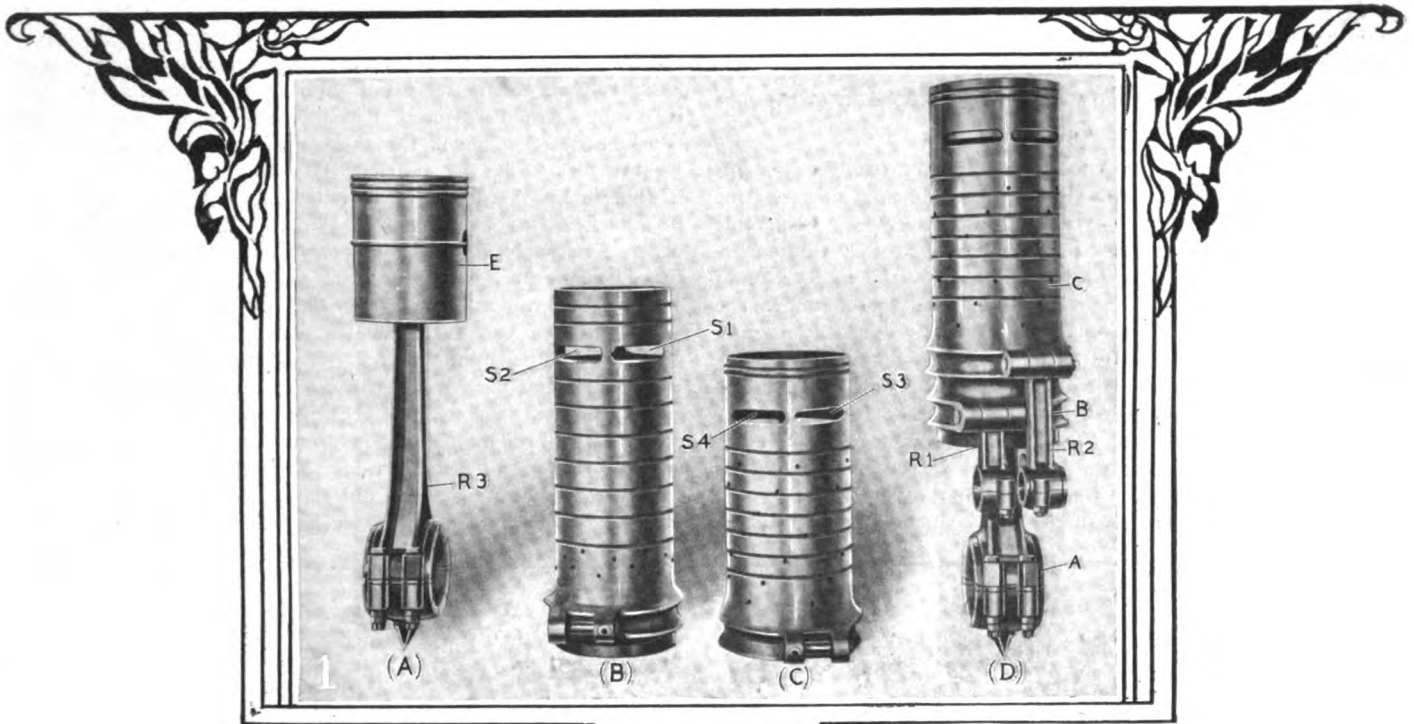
Presenting the connecting rod assembly of the sleeve type of motor, also the connecting rod with its piston in place, as well as the sleeves after they were taken out of a motor following 6,000 miles of tryout work
